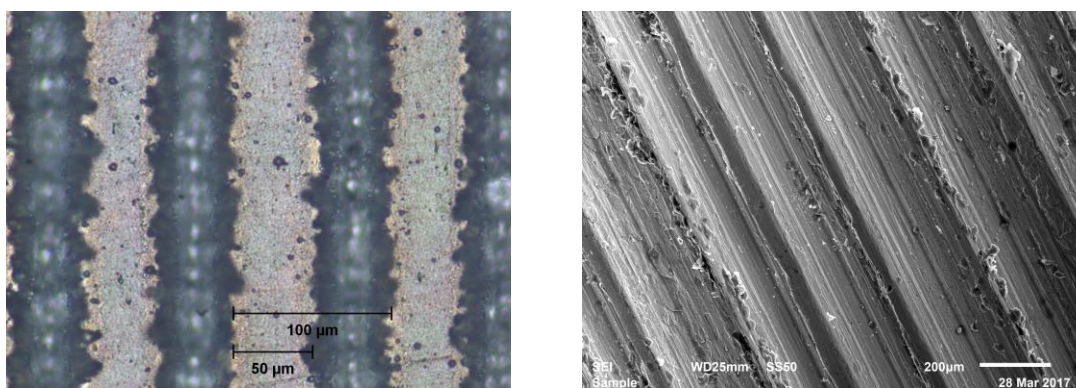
Samples cut by a metal cutting laser and triangular machining bit.
